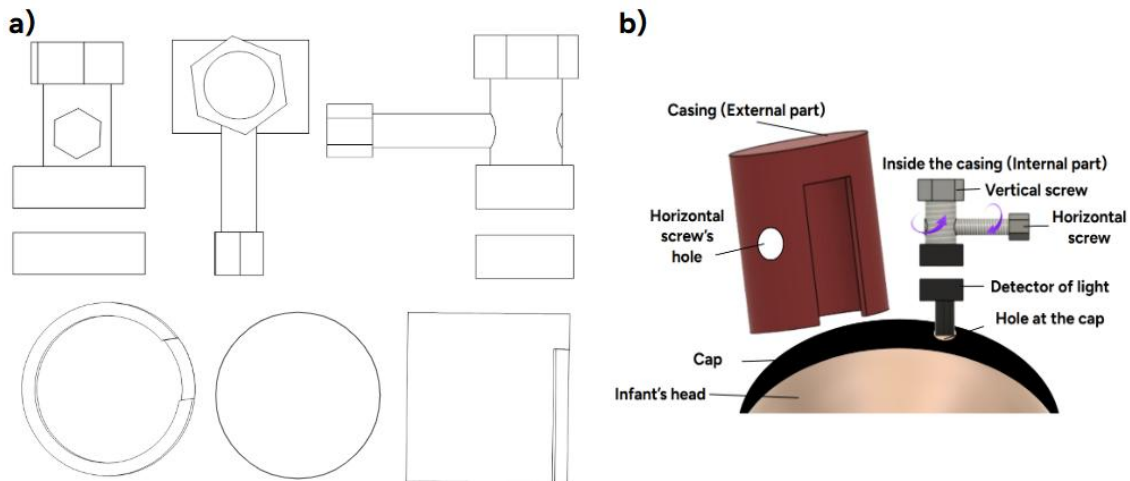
Design of the adjustable dual screw mechanism. a) Sketch of the individual components. b) 3D design generated in Autodesk Fusion 360 of the mechanism.
